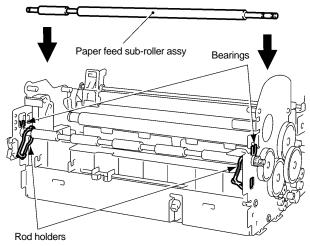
Installing the Paper Feed Sub-roller Assy (1)
